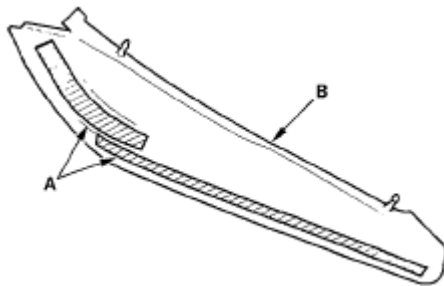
Identifying Trunk Opening Panel And Adhesive Tape
